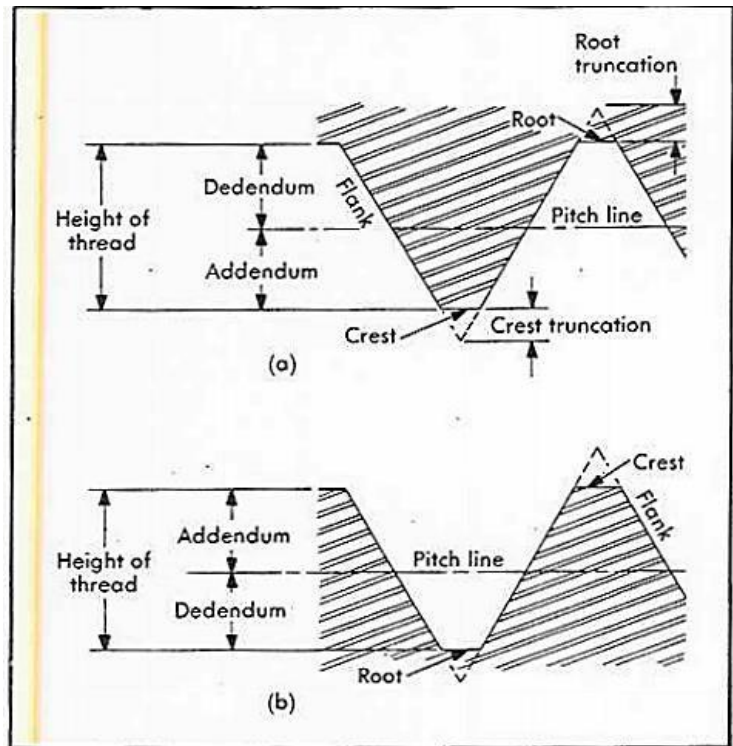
Screw thread terms relating to dimensions of internal and external screw threads: (a) internal threads and (b) external threads.
